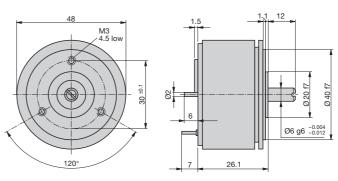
KINAX 2W2 with special drive shaft at front and at rear. At front: Ø 6 mm, length 12 mm. At rear: Ø 2 mm, length 6 mm.
